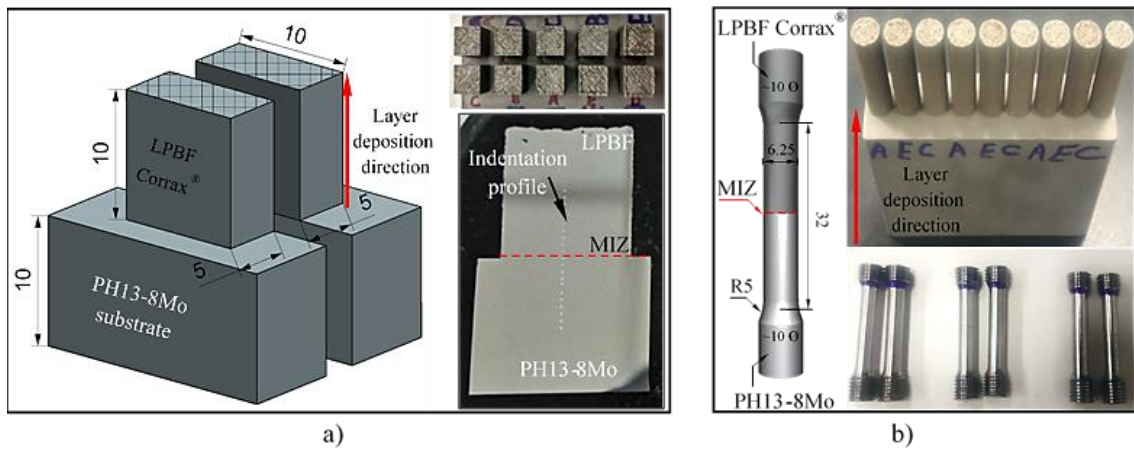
Hybrid samples manufactured by PBF-LB over the PH13-8Mo substrate: a) CAD of the cuboid sample, as-built and indentation schematic; b) tensile test samples as-built and machined (Marin et al., 2023).
